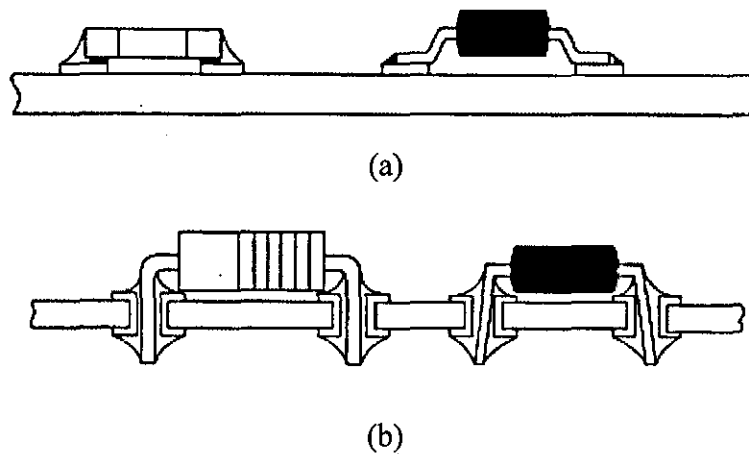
Schematic of printed circuit board technologies: (a) SMT; (b) THT [5]
